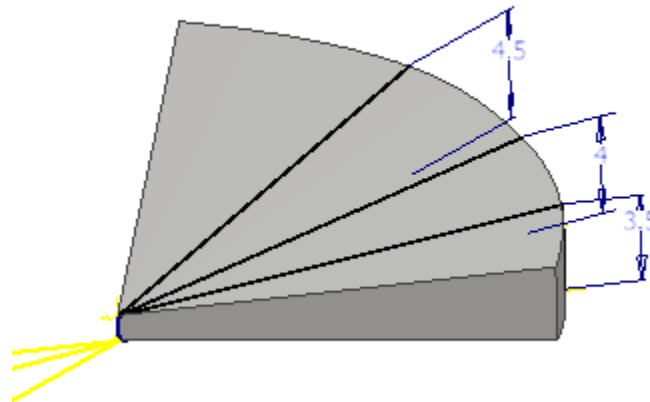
The sketches used by the loft tool to create the initial bottom core design.
